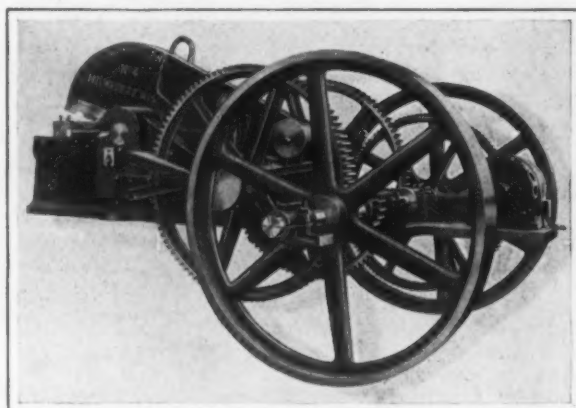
A Shears with Die Equipment for Cutting Material at Right Angles. The lower die fits the entire circumference of the bar to prevent distortion of the cross-section during cutting.
